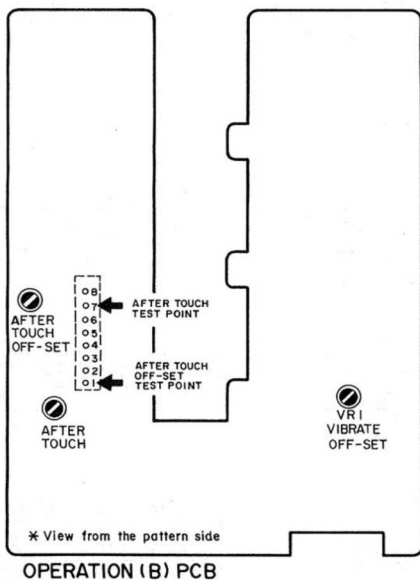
Adjustment points of the OPERATION (B) PCB.
